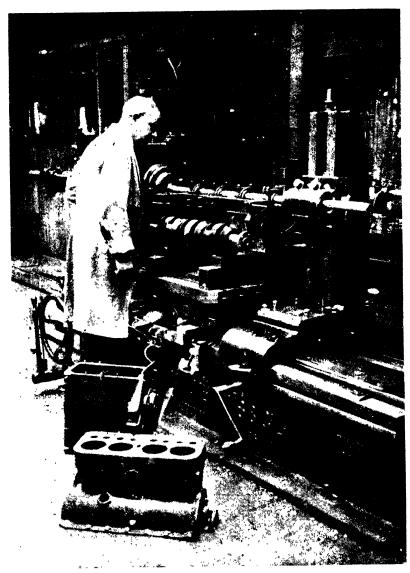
Boring small petrol-engine crankcase on a plain spindle horizontal boring machine
